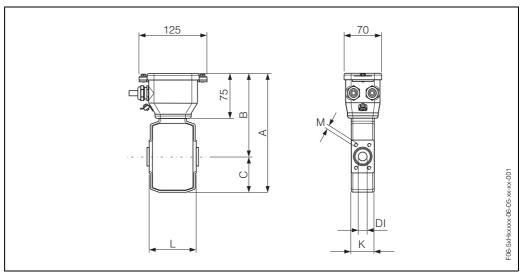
Dimensions Promag H / DN 225 (remote version)
